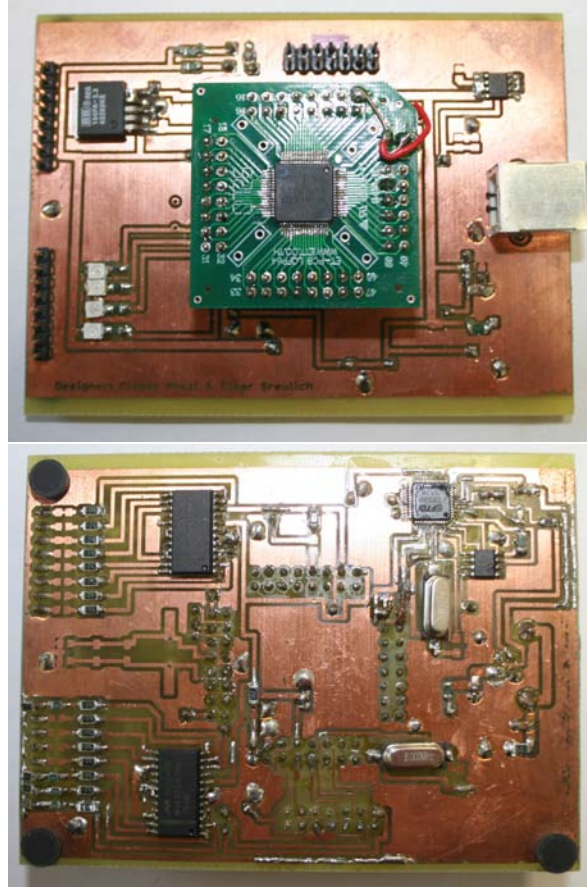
Top and bottom view of the ECG custom design emulator 2-layered PCB prototype.
